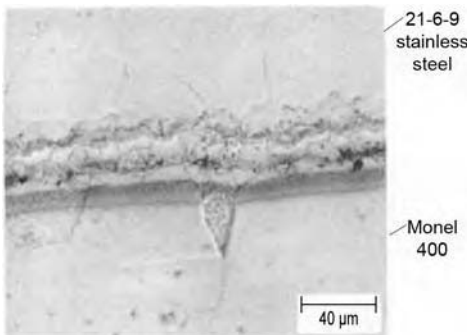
Metallographic cross section of the interface of a Monel 400 to 21-6-9 stainless steel weld produced by inertia-drive friction welding. Note the fine grain size present at the interface.
